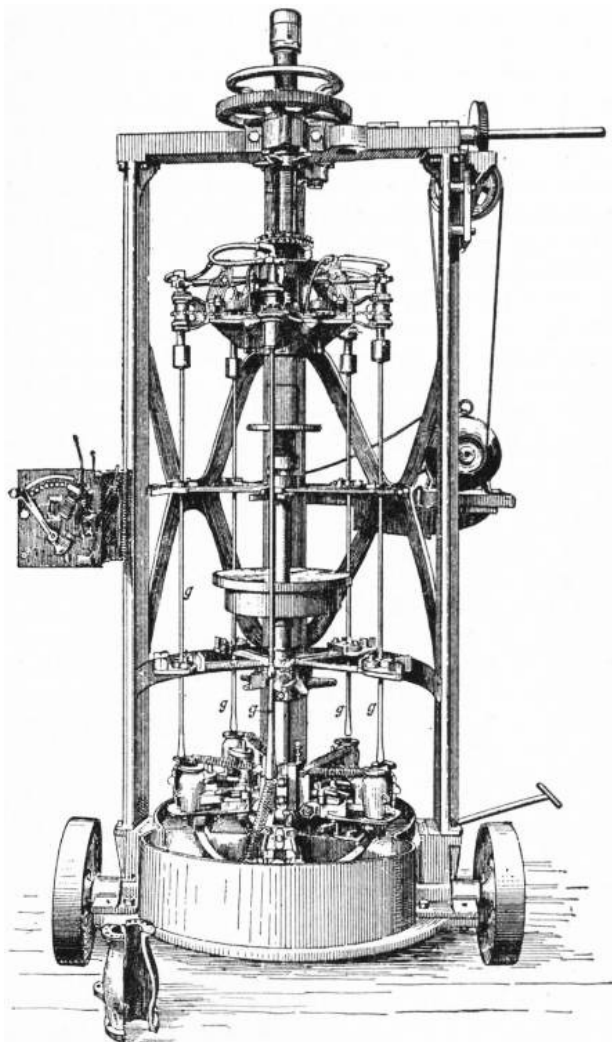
Owens's Glass-blowing Machine. *g,g,g*, Blowing-irons.
